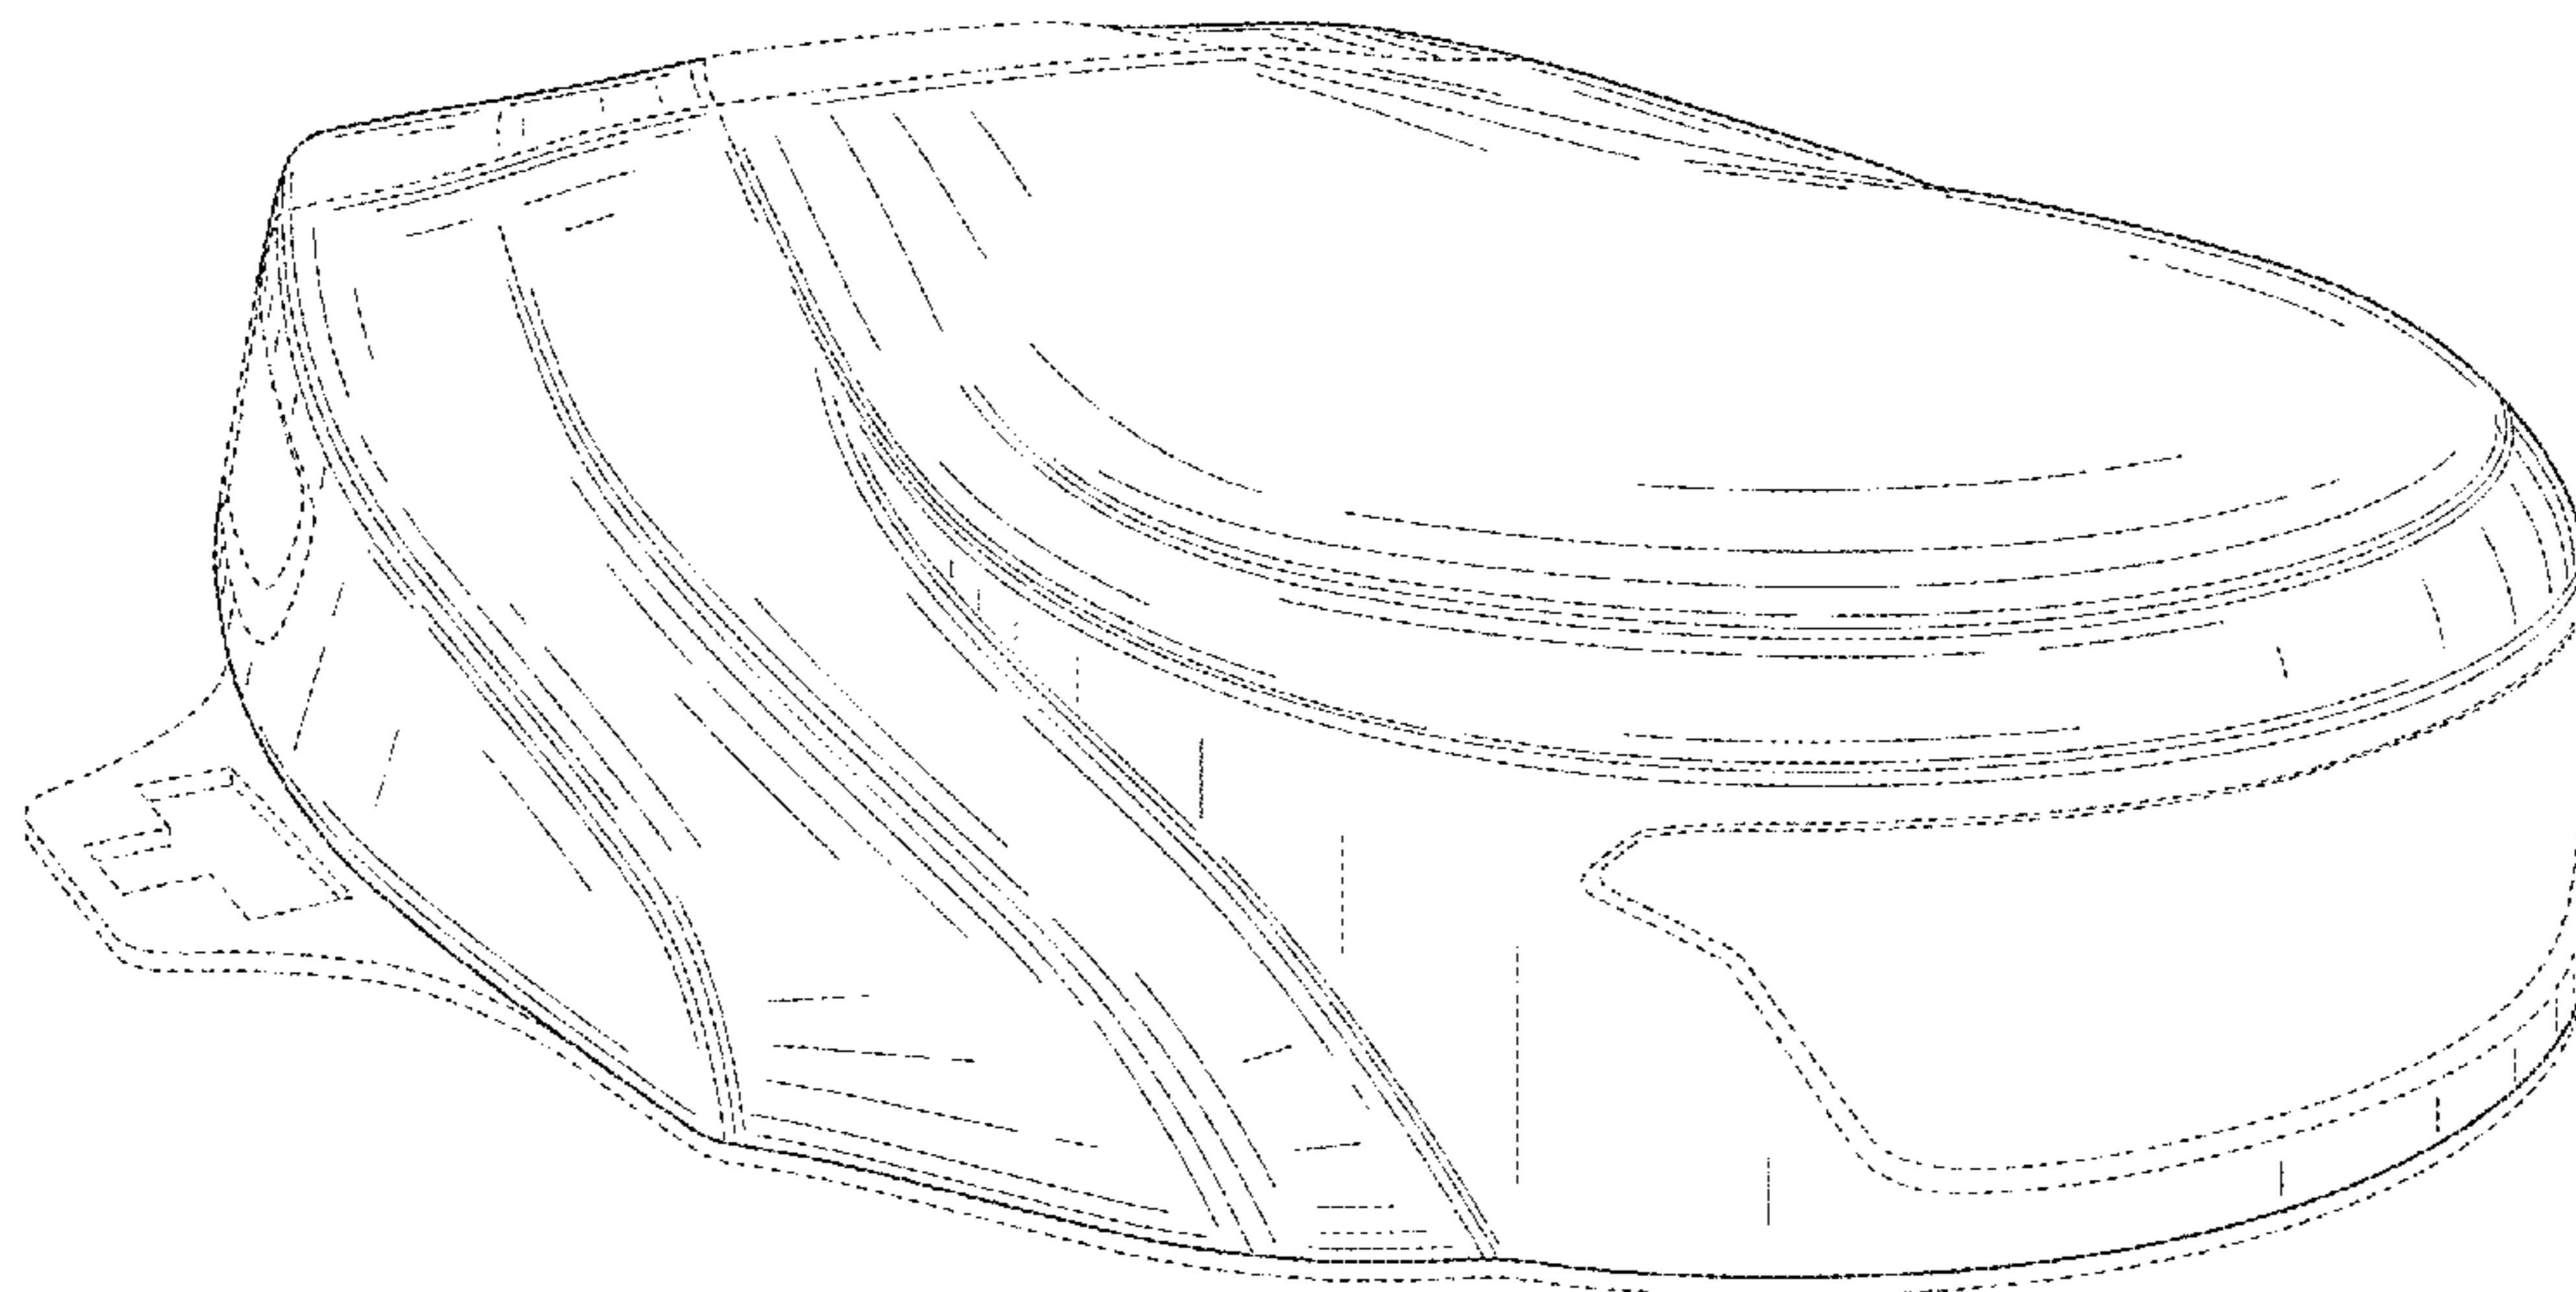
is a second side view of the GPS module housing illustrated in FIG. 1.
